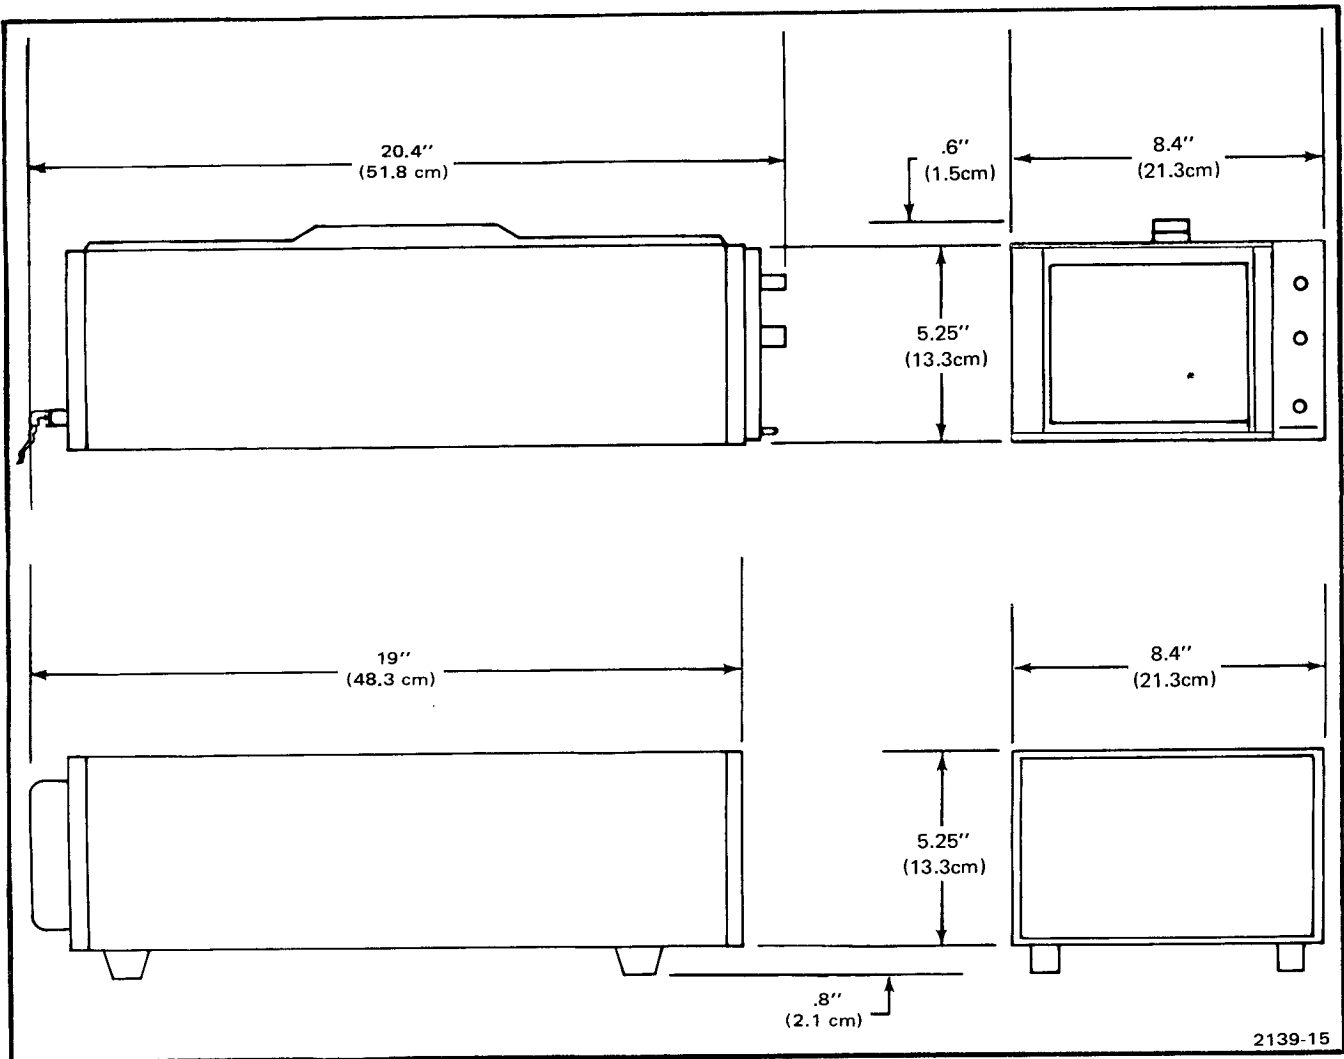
Illustration showing dimensions of the cabinet version of the 5440.
